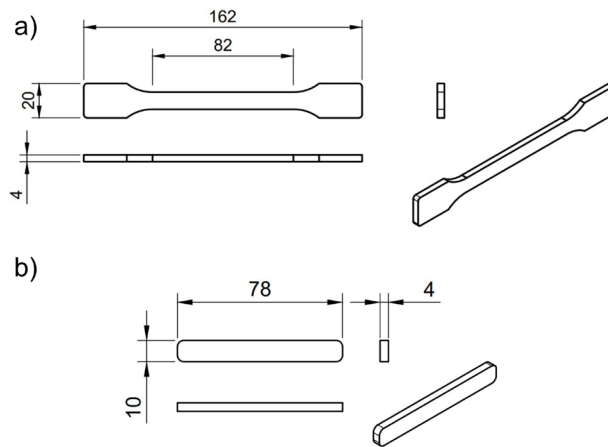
Specimen dimensions: a) tensile test specimen; b) bending and izod test specimen
